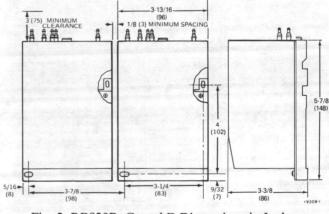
RP920B, C, and D Dimensions in Inches (Millimeters).
